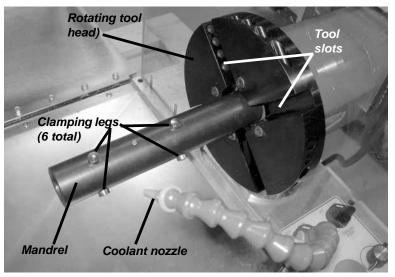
The photo shows the cutting head and mandrel of the SDB 206 machine. The pipe sample fits over the mandrel and is held in place by the clamping legs.
